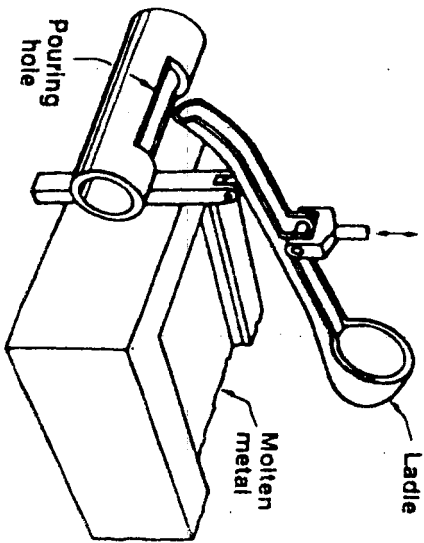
Simple mechanical ladle for cold-chamber machine.
